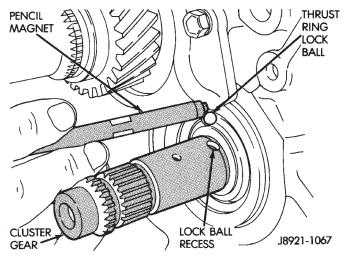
Install Fifth Gear Thrust Ring Lock Ball
